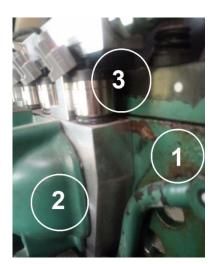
Example of gas injectors placed on a converted Diesel engine: 1 - engine block, 2 - intake manifold, 3 - gas injectors with gas plate
